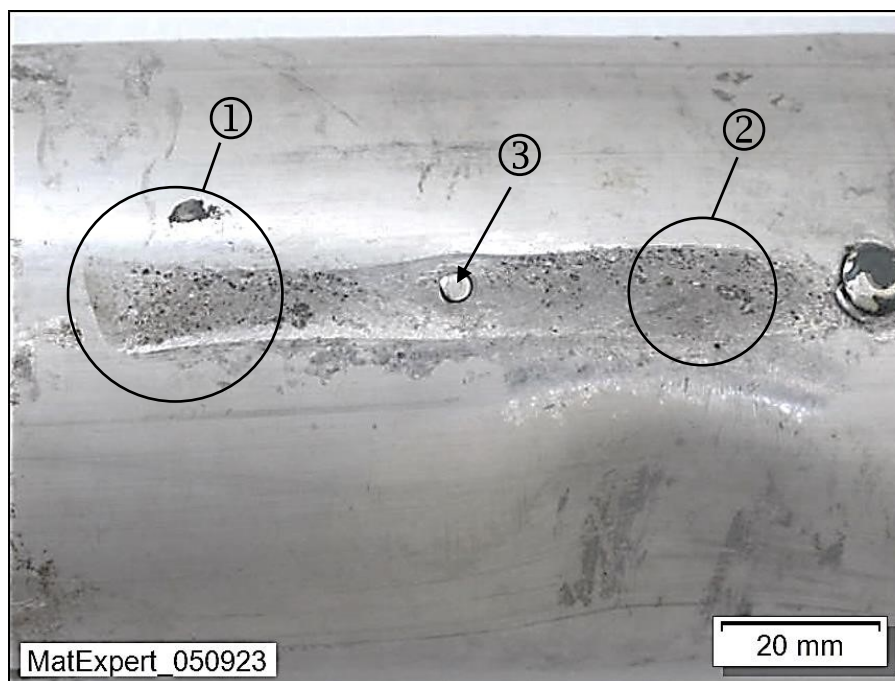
Close-up – crack surface in the exposed crack with fatigue fracture and intergranular cracks.
